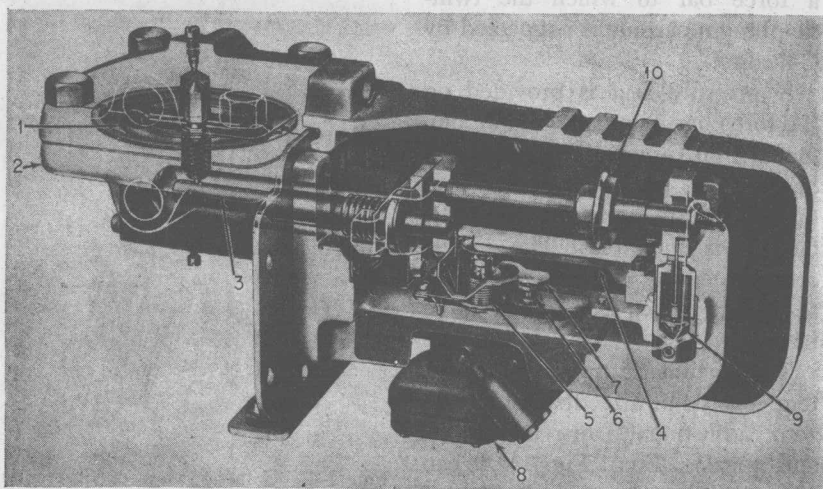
Cutaway view of differential pressure transmitter, pneumatic type. (Minneapolis-Honeywell Regulator Company.)
